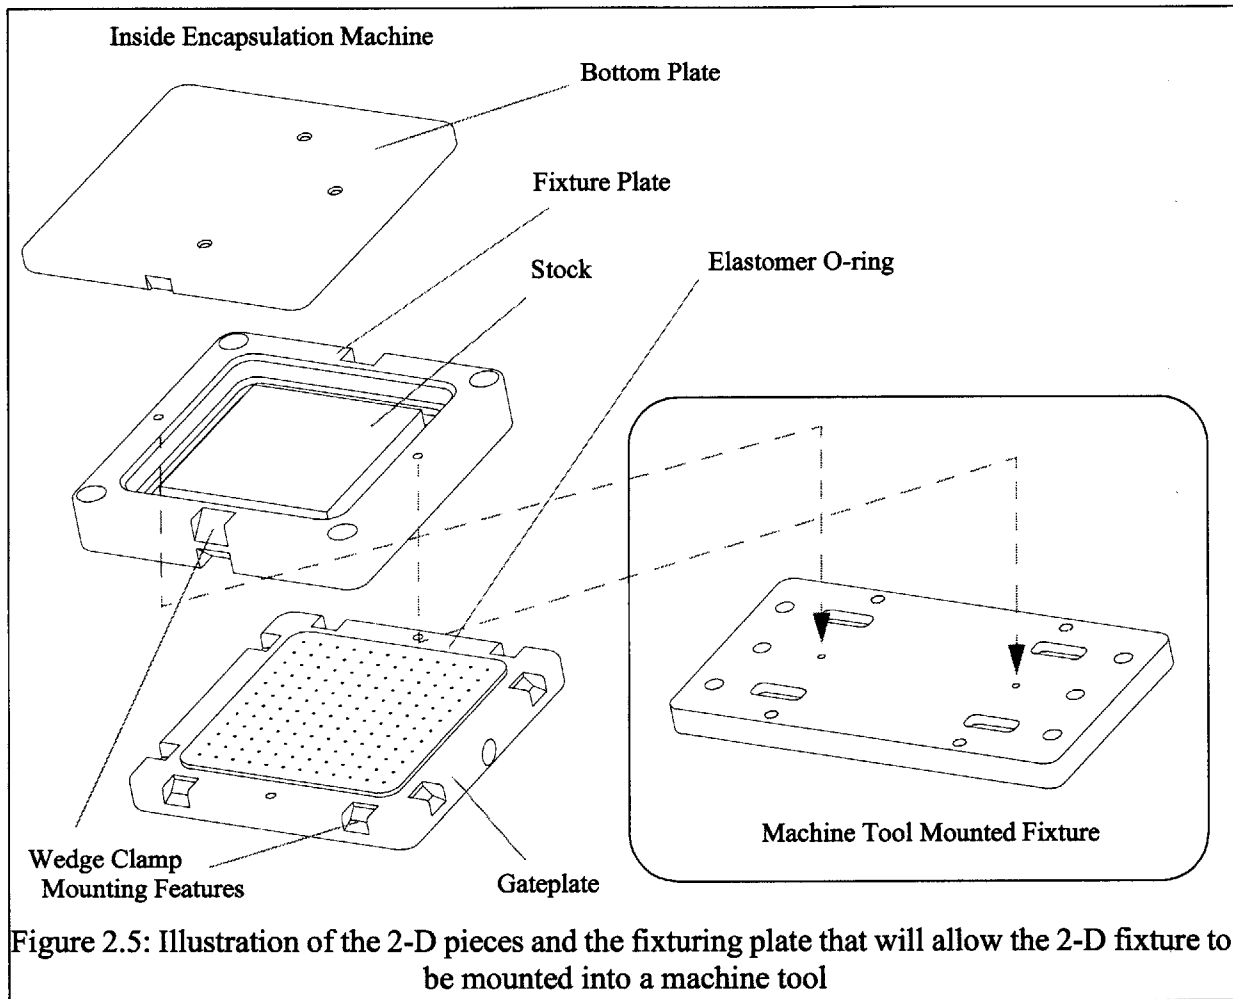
Illustration of the 2-D pieces and the fixturing plate that will allow the 2-D fixture to be mounted into a machine tool
